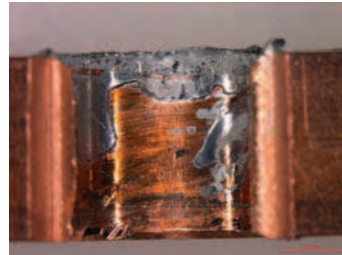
Cut through a copper bus bar after removal of the socket indicating the insufficient dis-
